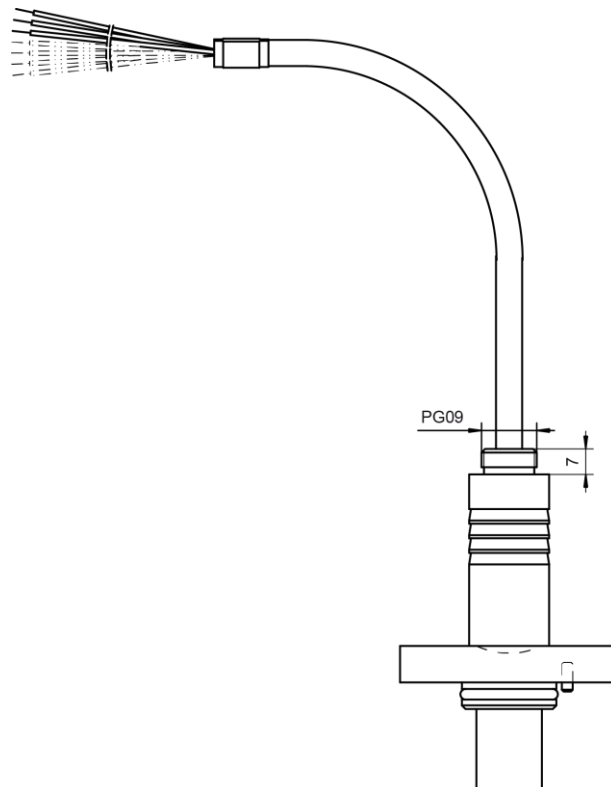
/25: Cable protection can be installed subsequently (X10 = cx) (example)
